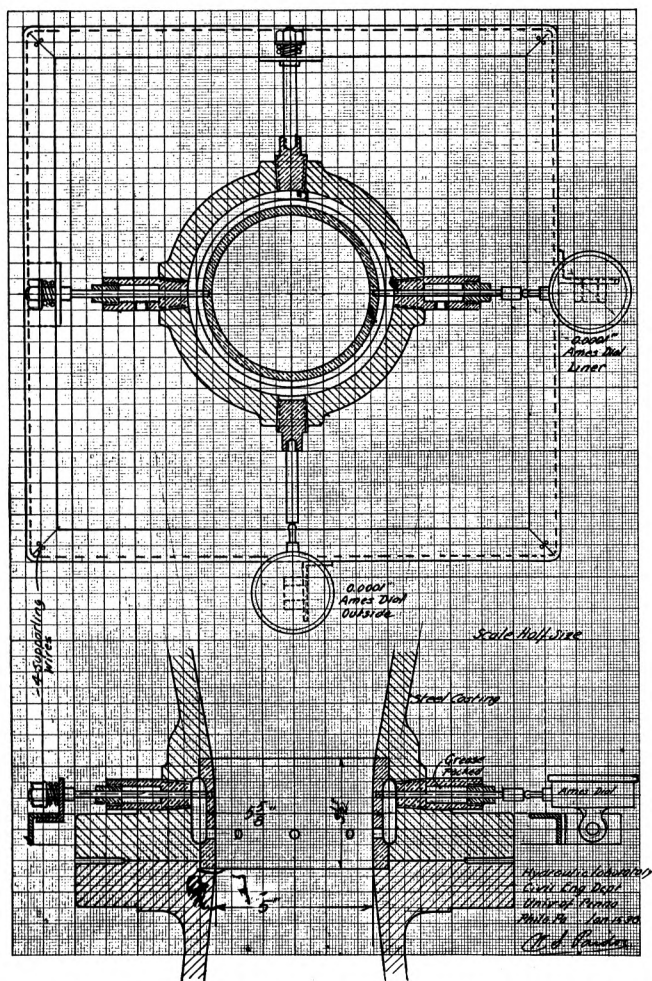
DETAILS OF APPARATUS FOR MEASURING THROAT AND BODY EXPANSIONS UNDER PRESSURE
